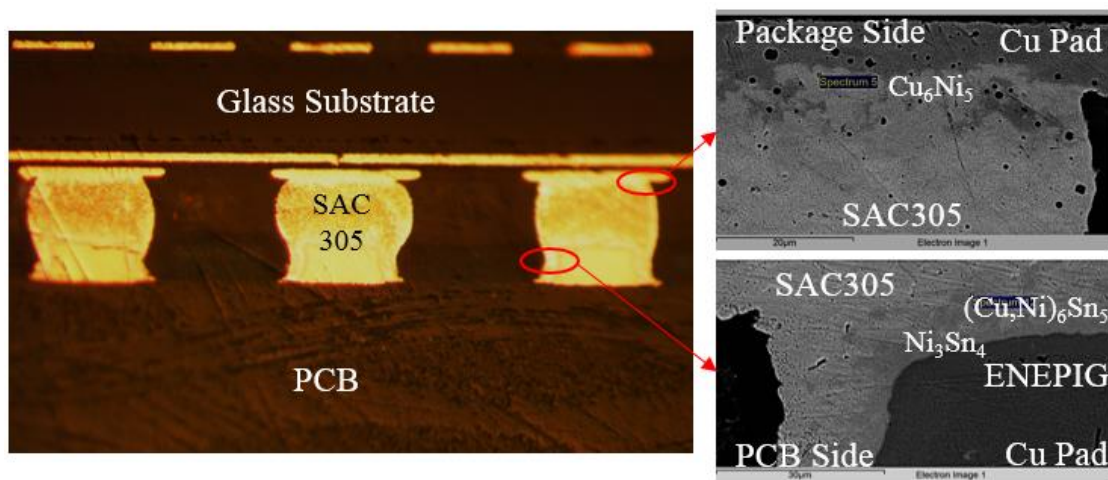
Optical and SEM/EDS characterization of paste-printed BGA after board-level assembly.
